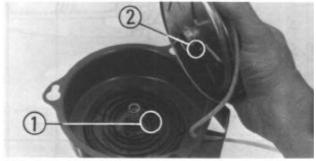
① Recoil starter spring hook ② Starter pulley stopper
